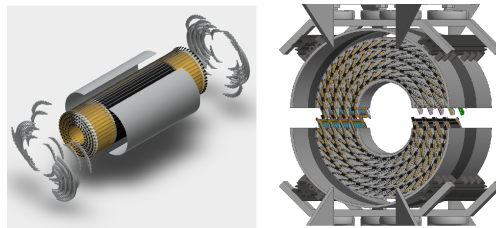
Auto-Cad drawing of INTT Barrels Support Structure.
